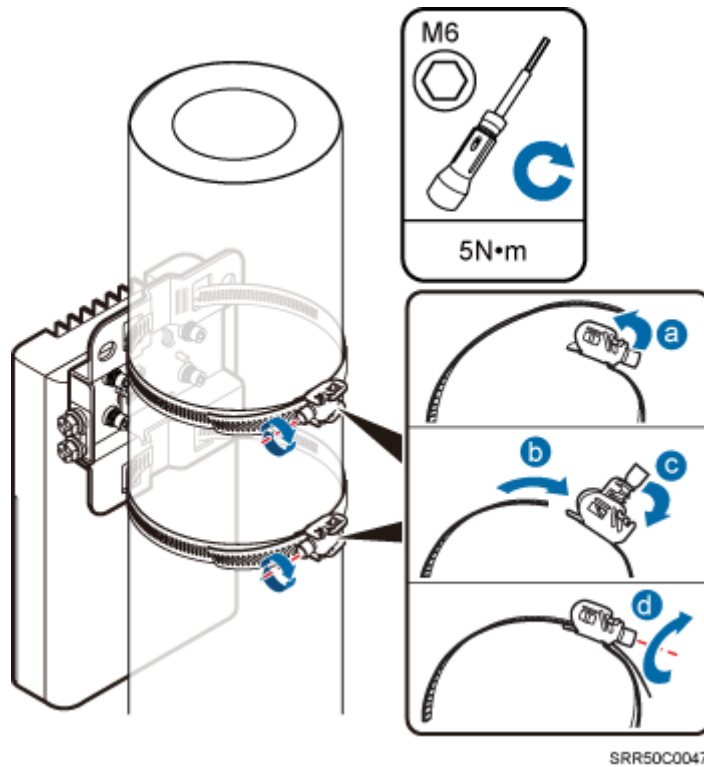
Routing hose clamps through the Dock separate mounting bracket
